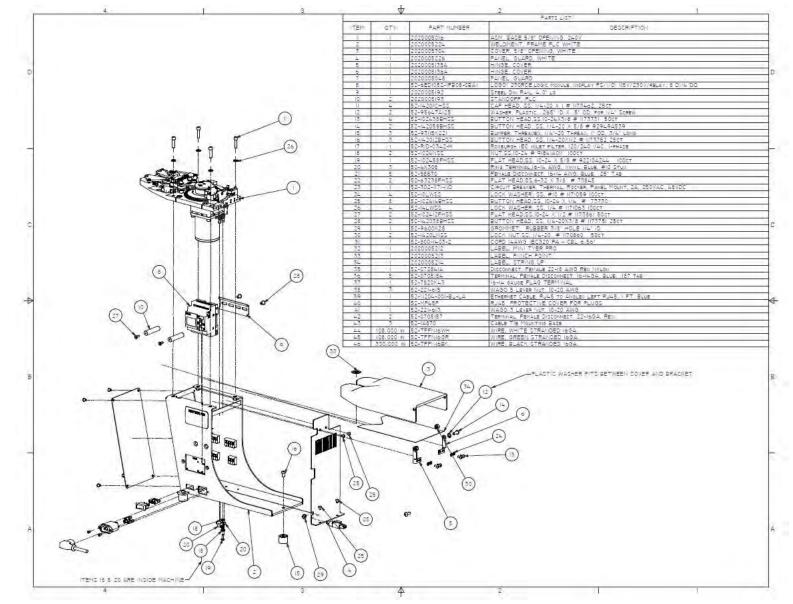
Drawing 20200051051 View 2 (5/8" Model, 240VAC)
